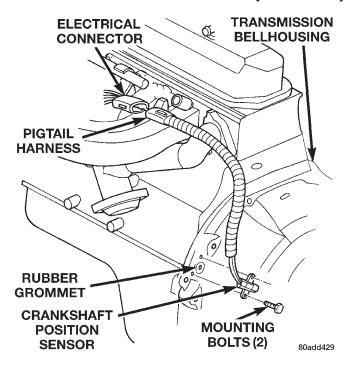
Crankshaft Position Sensor—Manual Transmission (Typical)
